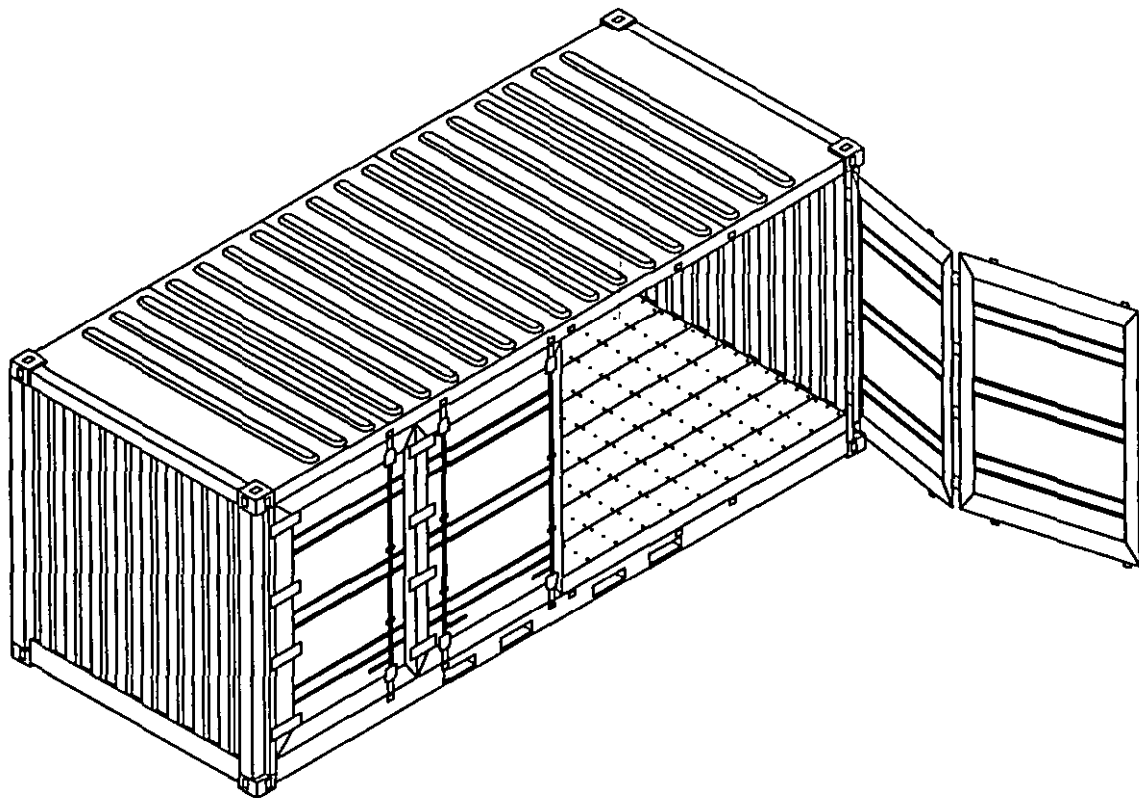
TYPICAL SIDE-OPENING CONTAINER
